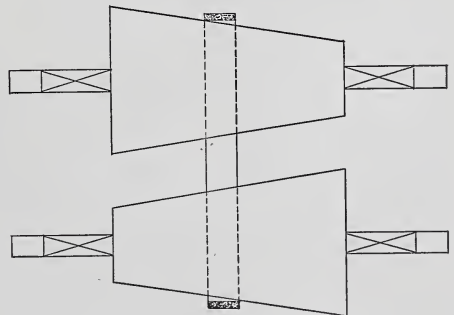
THE DOUBLE-CONE VARIABLE-SPEED GEAR
